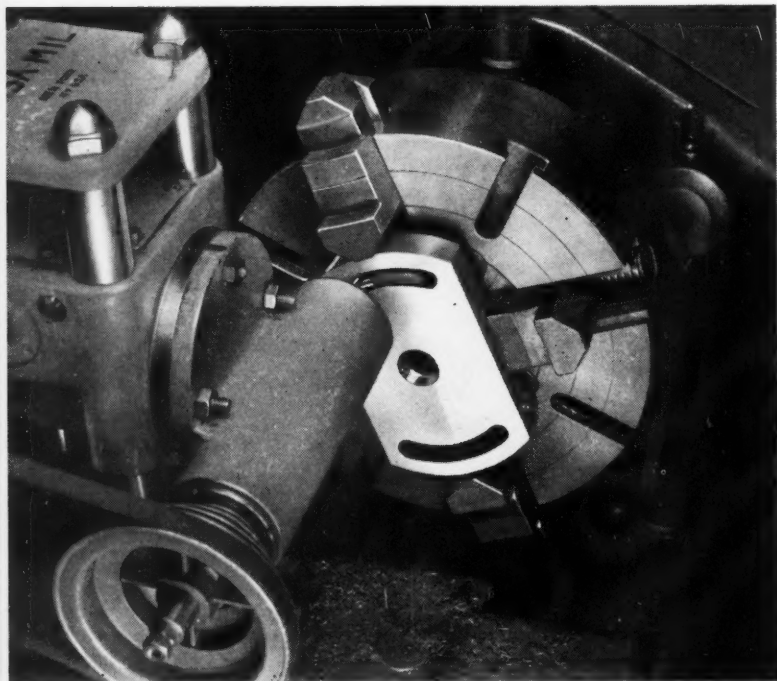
Curved Slots can be Milled in the Face of a Part by Means of the Milling and Drilling Head Illustrated and a Dividing Head (Not Shown)
